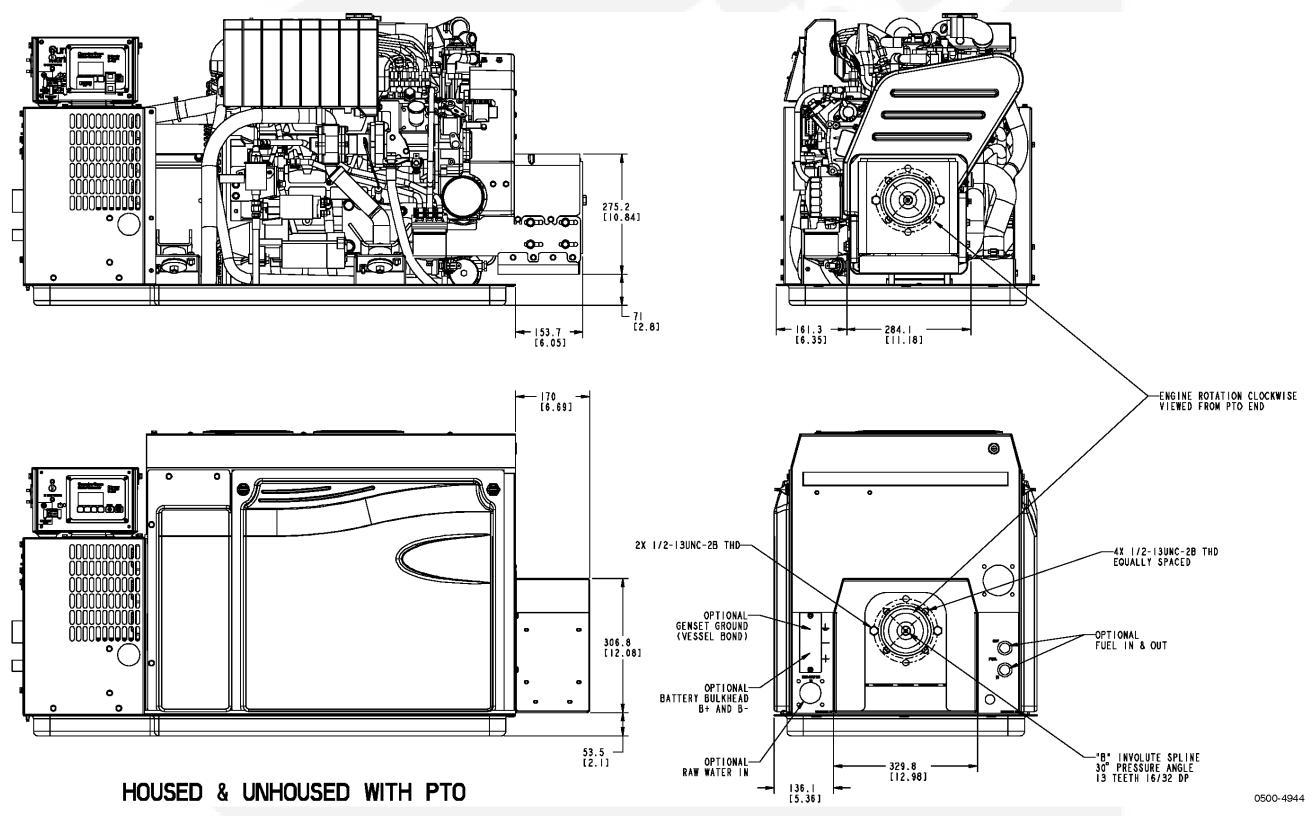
MDKBP, MDKBR, AND MDKBV OUTLINE DRAWING (SHEET 3)
